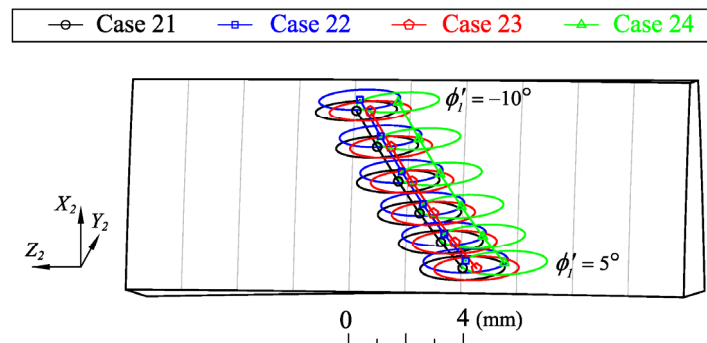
KEs of the gear set with convex pinion and conventional helical gear under crossed axes mounting mode and different assembly conditions
